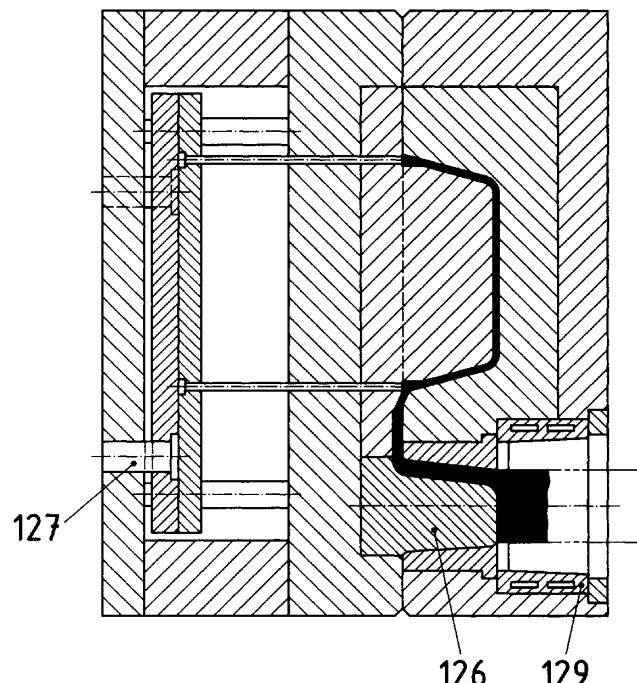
Diecasting die for cold-chamber diecasting machine with horizontal pouring sleeve
